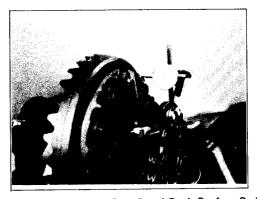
Measurement of Gear Bevel Back Surface Swing
